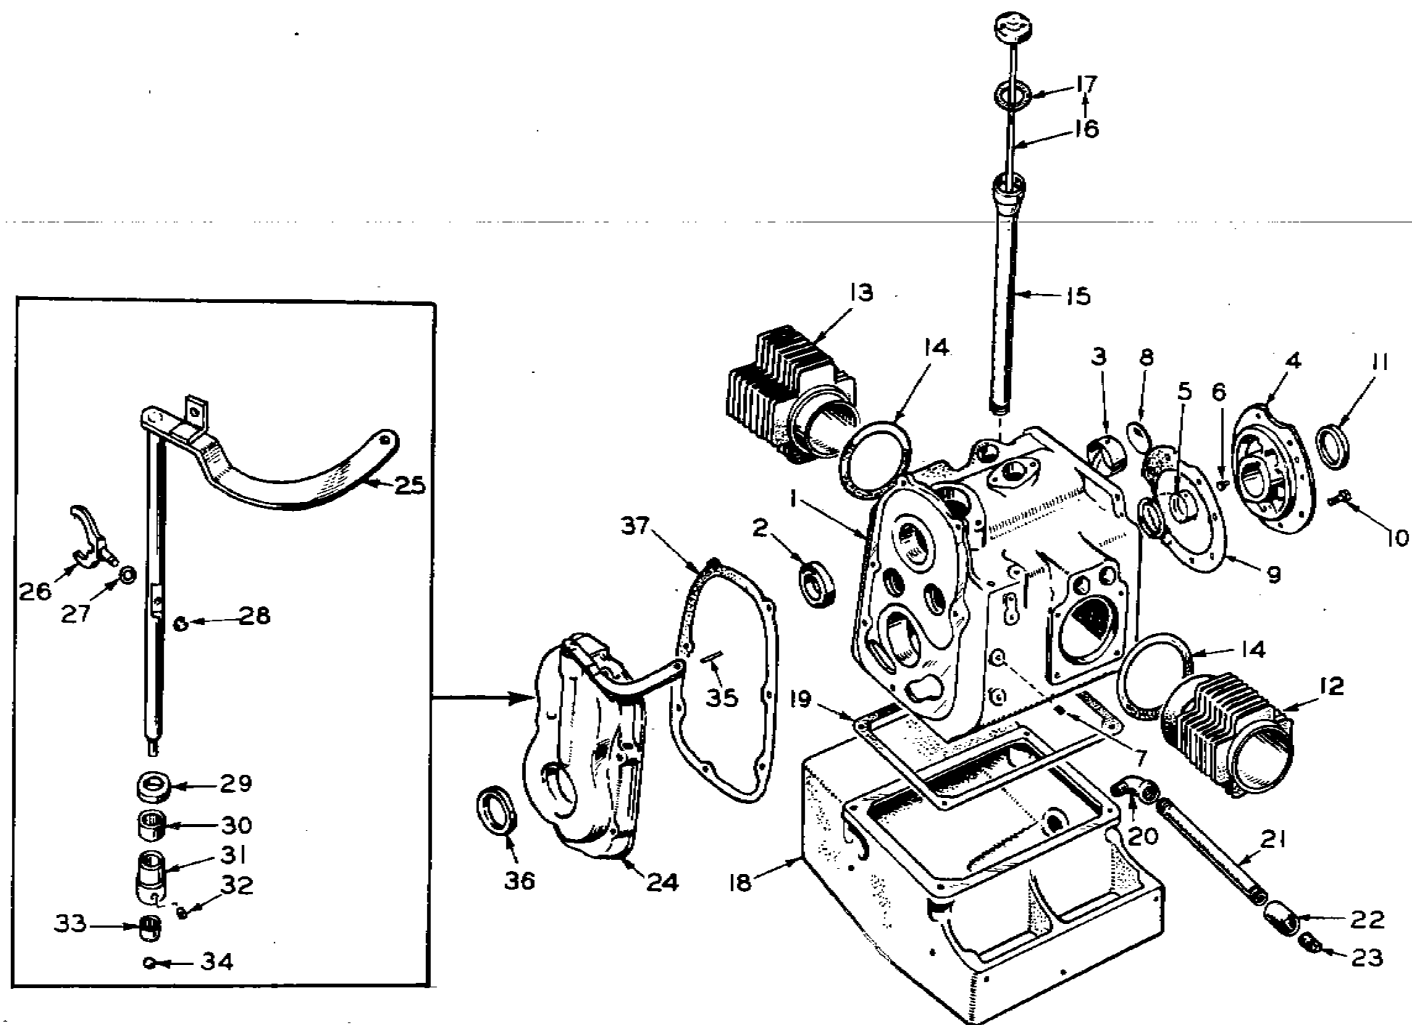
CRANKCASE, OIL BASE AND GEAR COVER GROUP
